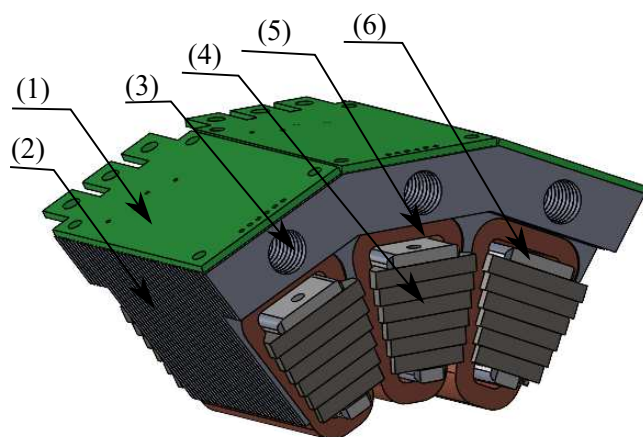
3D CAD model for the three teeth experimental setup: (1) inverter module PCB, (2) aluminium shared cooling structure, (3) cooling channel, (4) core, (5) winding, (6) epoxy infiltrated gap.
